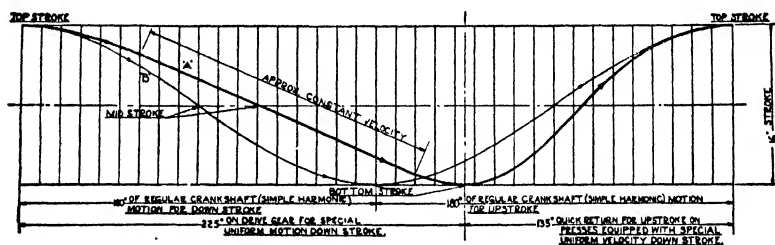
Compared at the same strokes per minute, the "slow draw" drive gives a slower and more uniform drawing speed and a quicker return than the normal crank motion.
